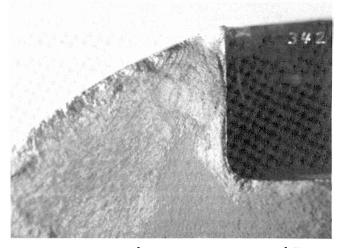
Fatigue Nucleation at Fretting Line and Keyway Corner on Turbine Shaft (Figure 29).
